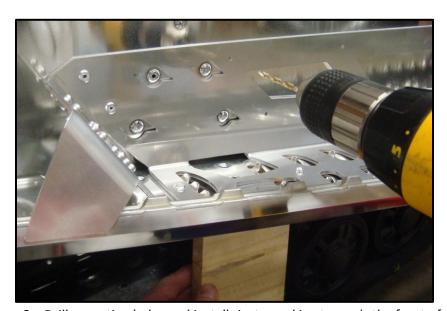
Drill mounting holes and install rivets working towards the front of sled
